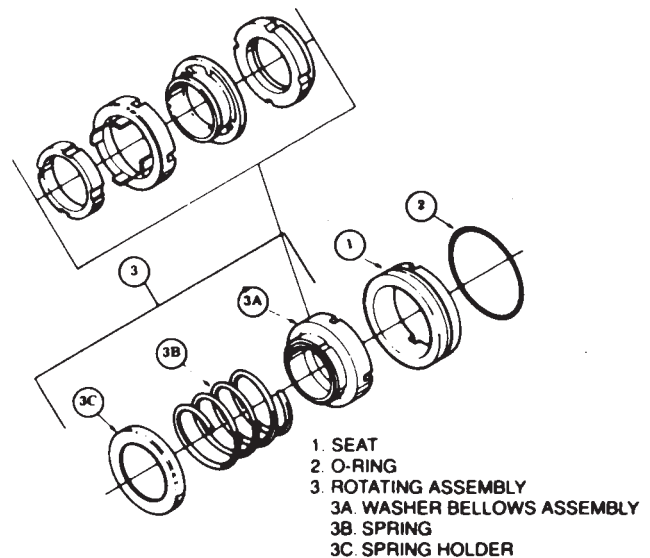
Crane Type 9 Mechanical Seal - Clamped Seat
